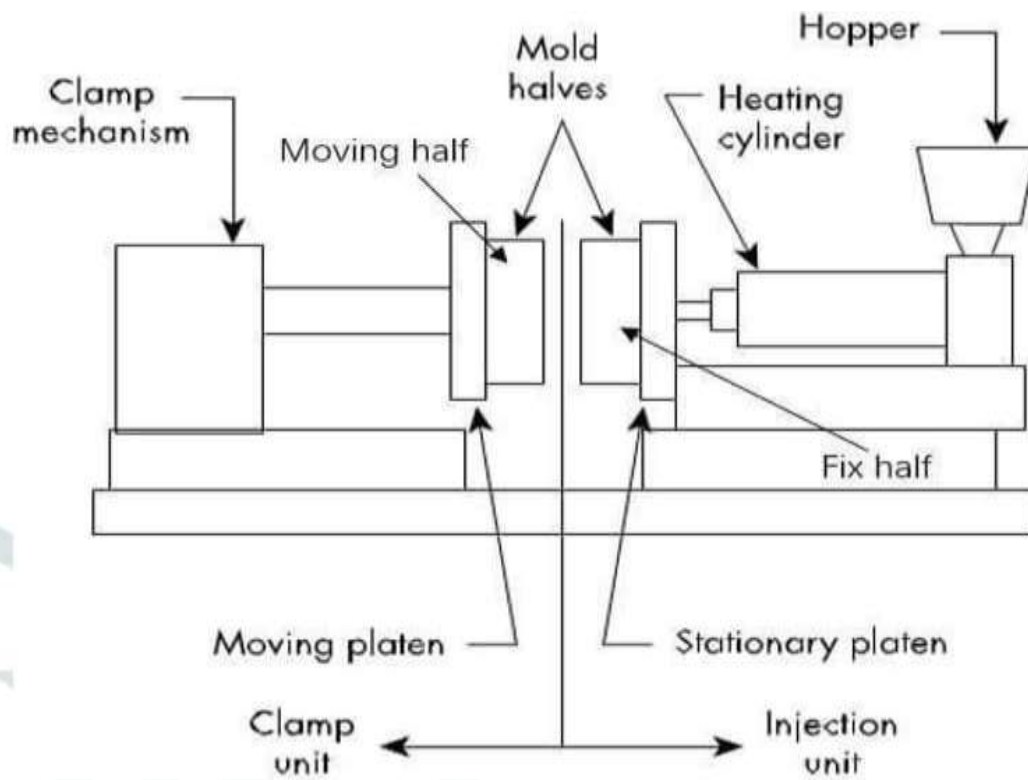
Moulding Machine Diagram (Mohammed et al, 2015)
